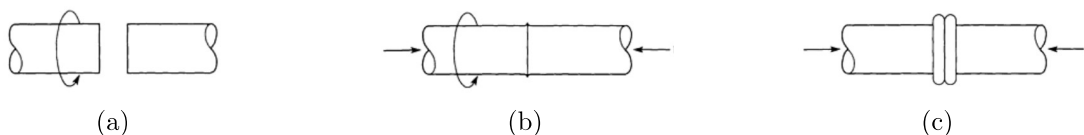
Schematic illustration of the principle steps in rotary friction welding: (a) initial phase, (b) friction phase and (c) forging phase [70]
